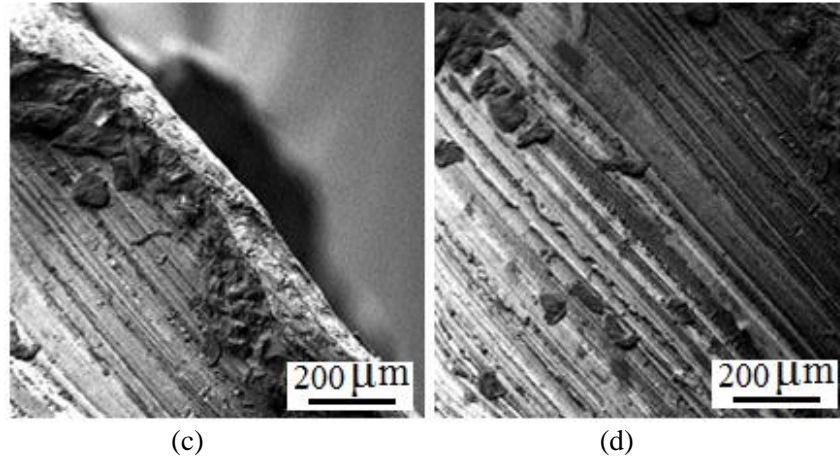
Macroscopic Configuration and Fracture Surface of Steel Specimens (200µm)
